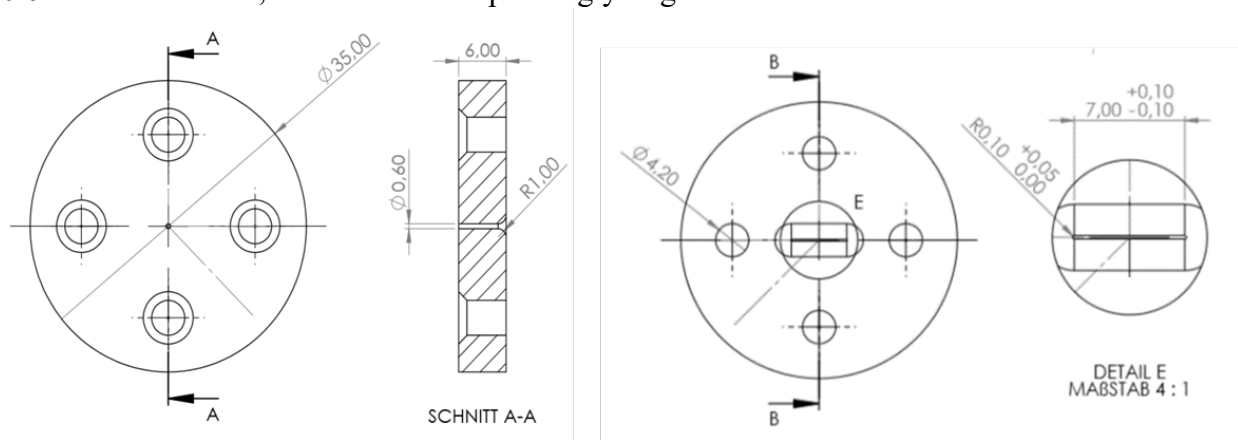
Nozzle heads; left 0.6 mm round, right 7 mm flat
